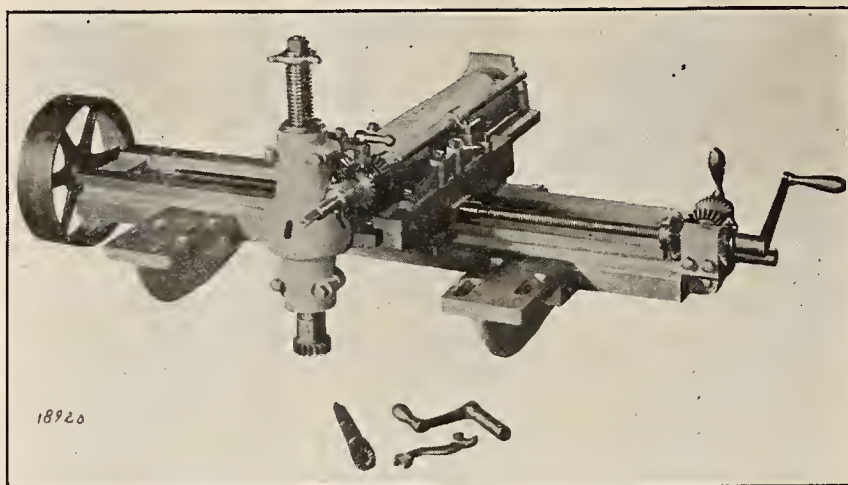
UNDERWOOD PORTABLE MILLING MACHINE.
